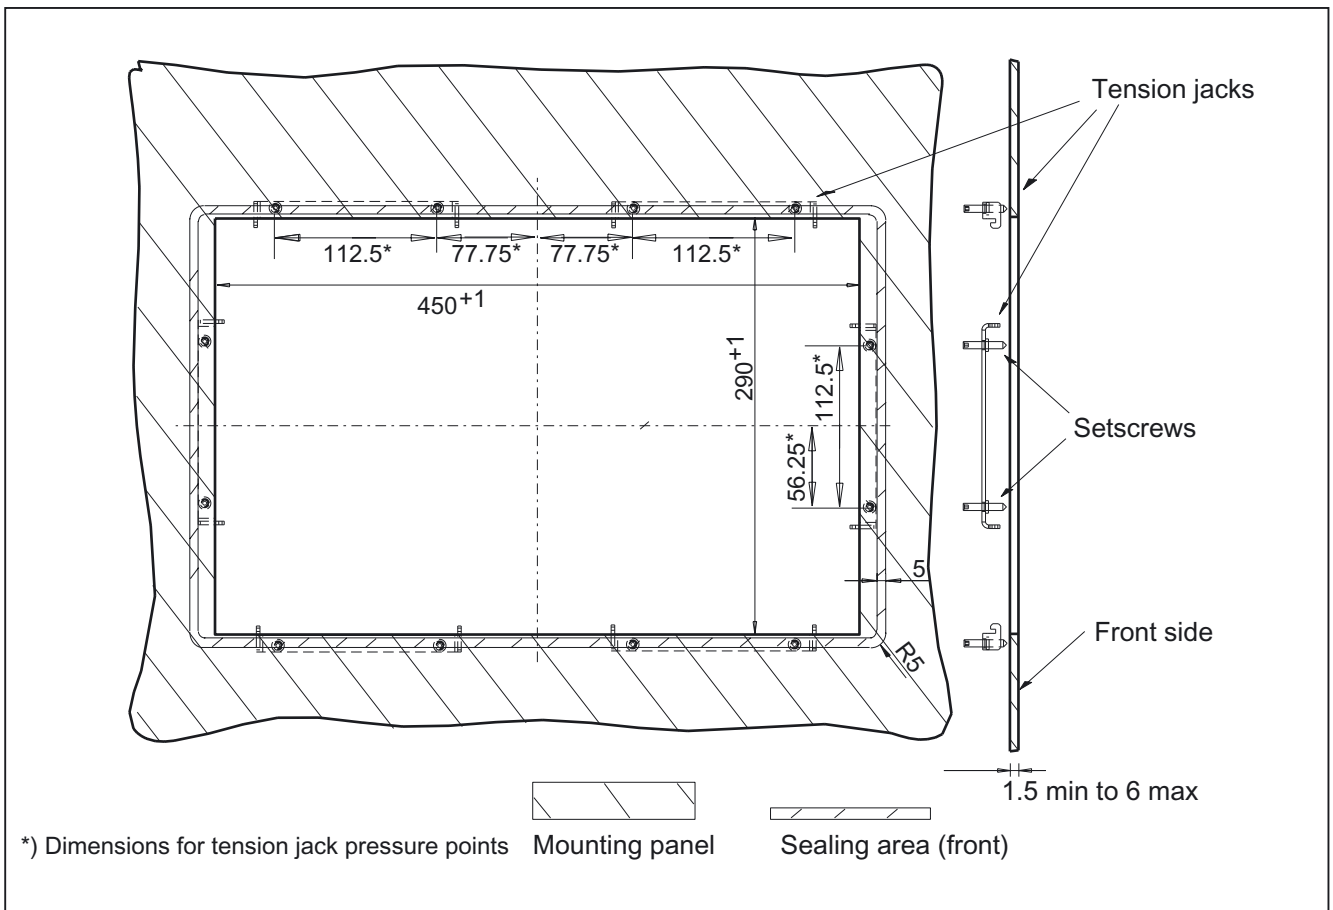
Dimension sheet for installing the OP 010C operator panel front
